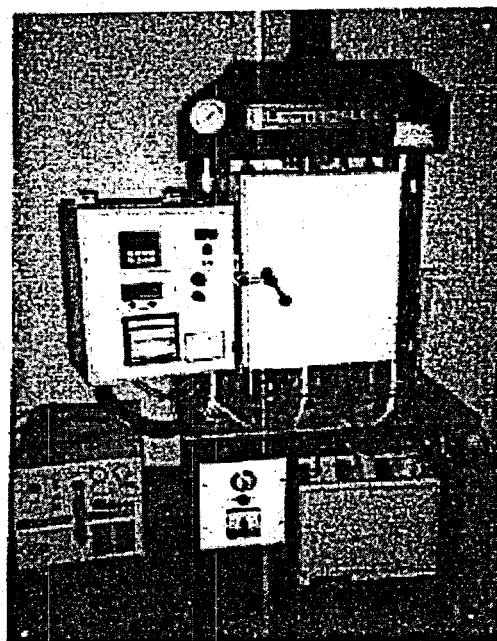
Large vacuum chamber used for anvils sintering
